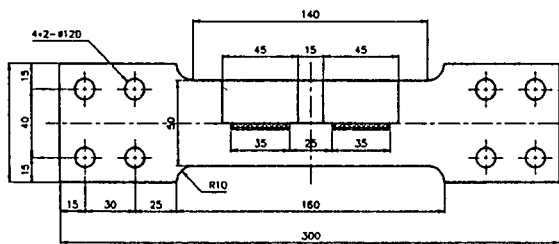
2Pad-on-plate specimen(continuous welding)
